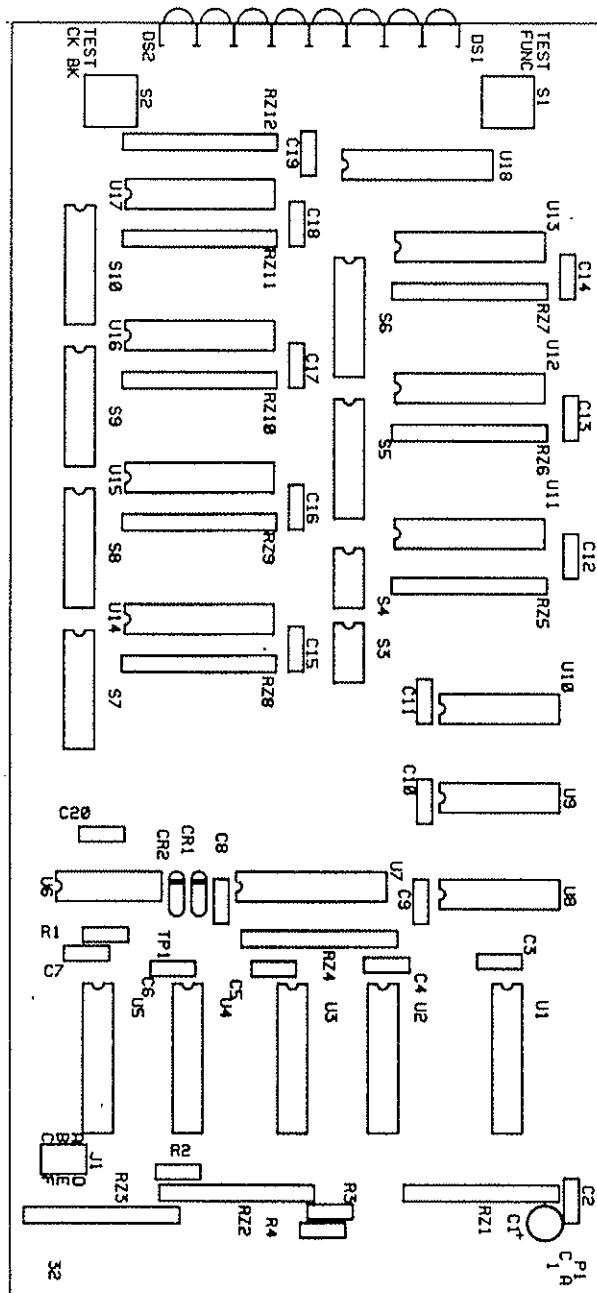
Component locator drawing, RFL 97 TX INTER Transmitter Interface Module
